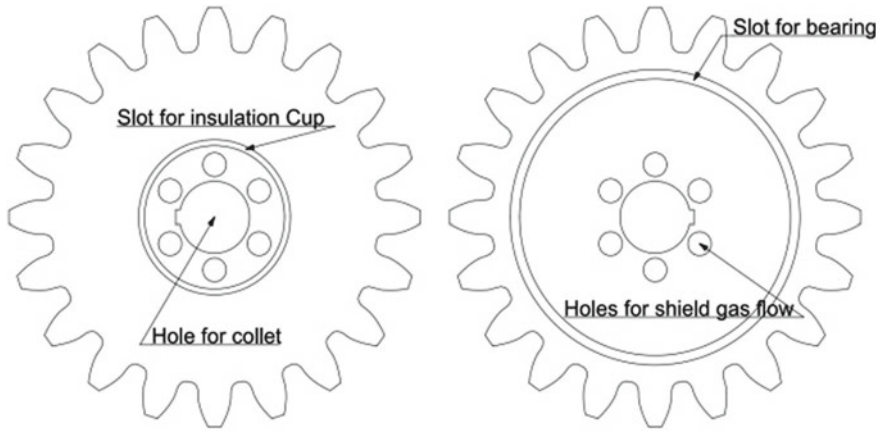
Front and back view of driven gear with passage of shielding gas
